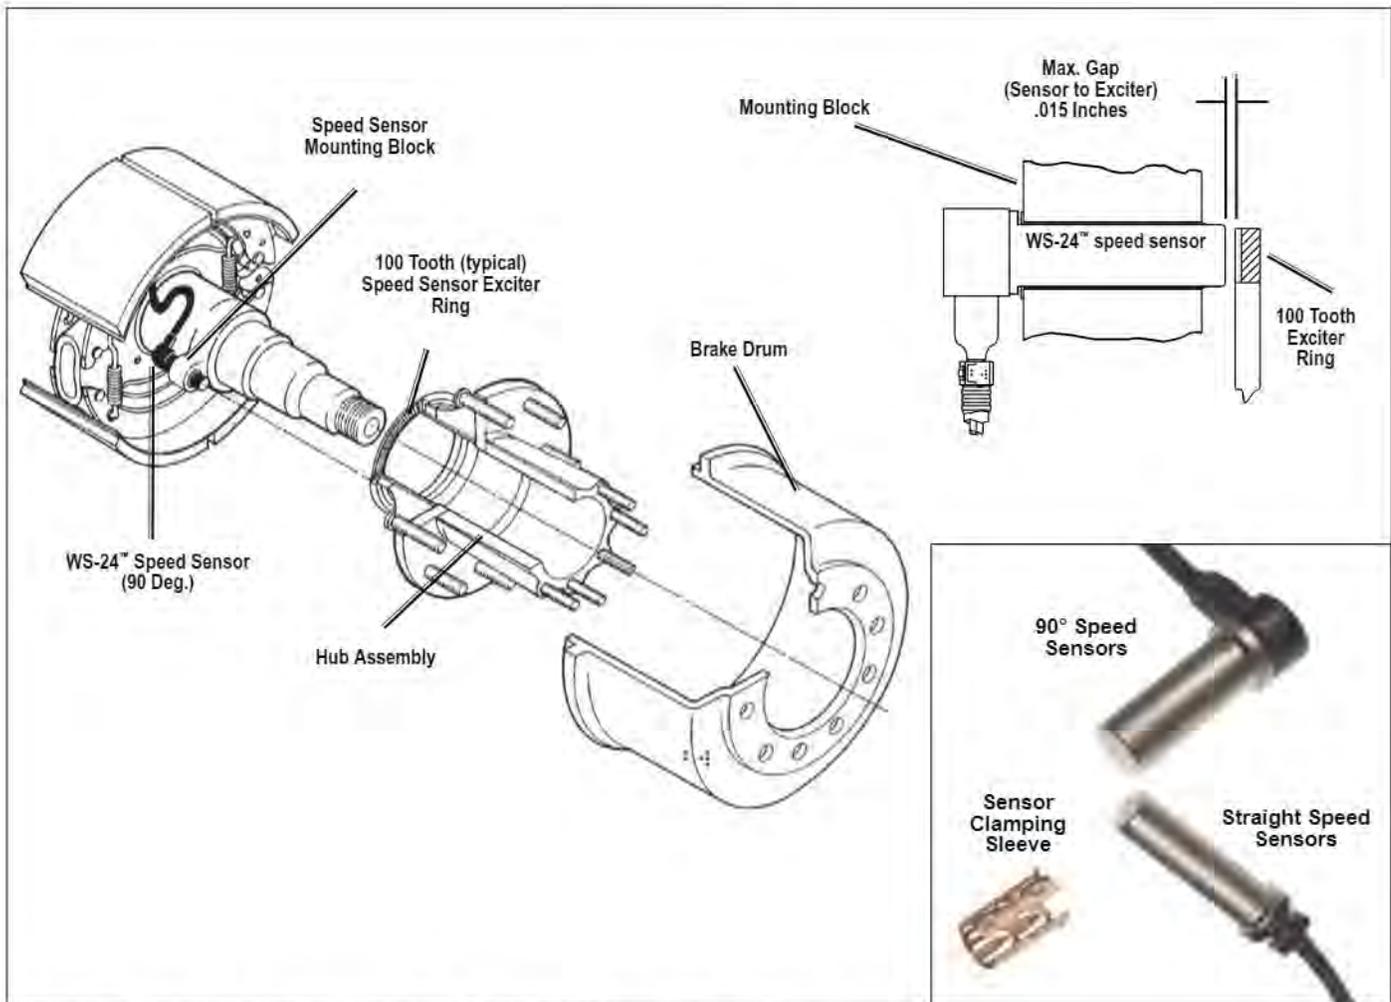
BENDIX® WS-24™ WHEEL SPEED SENSOR INSTALLATION
